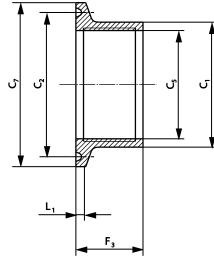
Sectional drawing of a clamp fitting acc. to ISO 2852 - CO
